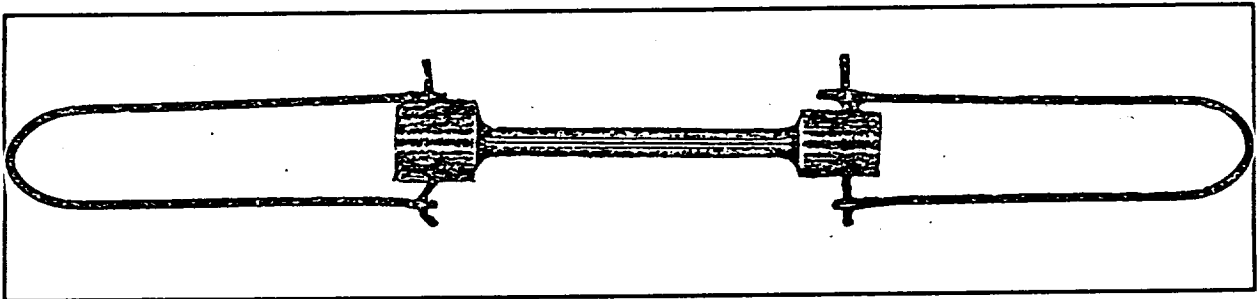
Initial Test Bar Support Scheme (Caused Bar to Bend)
